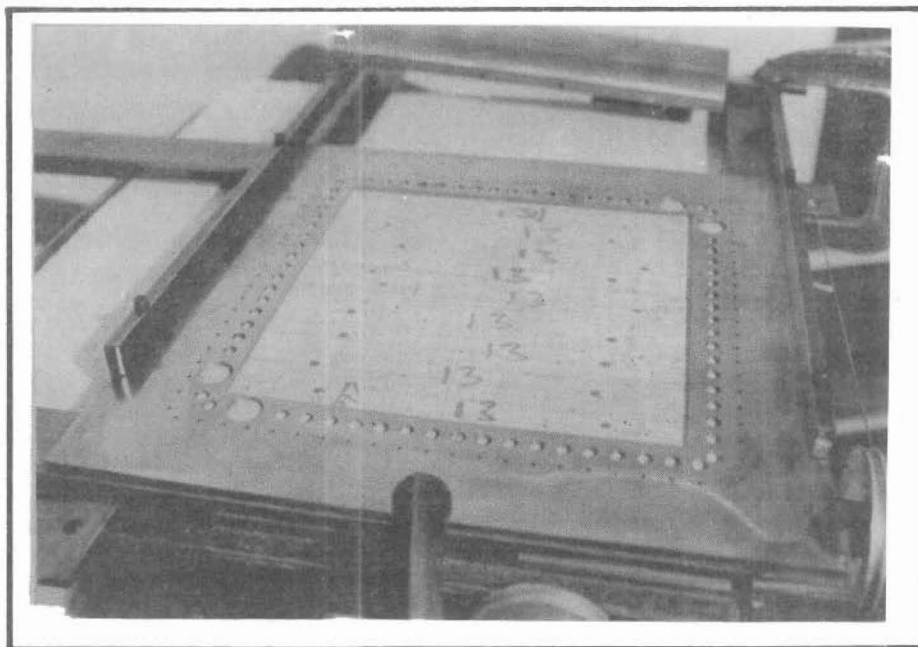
8 in. square element completed showing template for positioning nails and holes for shear apparatus.
